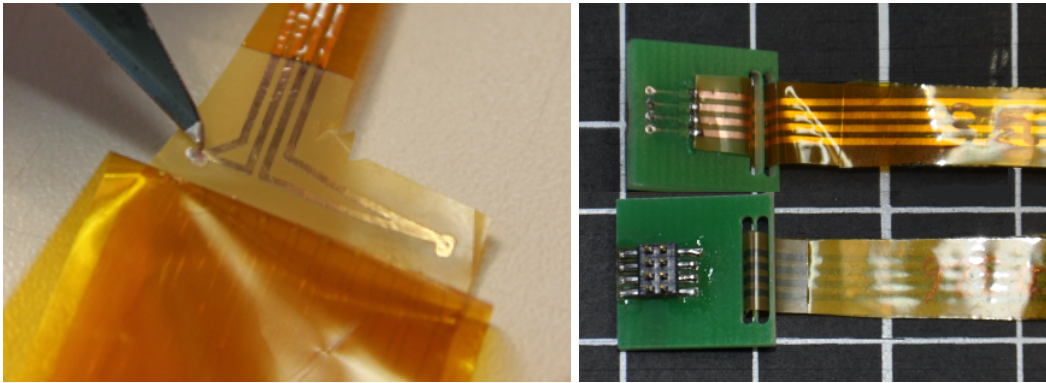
Attaching the polyimide tape with the wound platinum wire to the intended area of the polyimide foil based cable and applying conductive adhesive to the contact pads [59] (left), top and bottom side of the PCBs with pin headers and two slits for tension relief of the soldering joints connected to the temperature sensor cables as a plug [111] (right)
